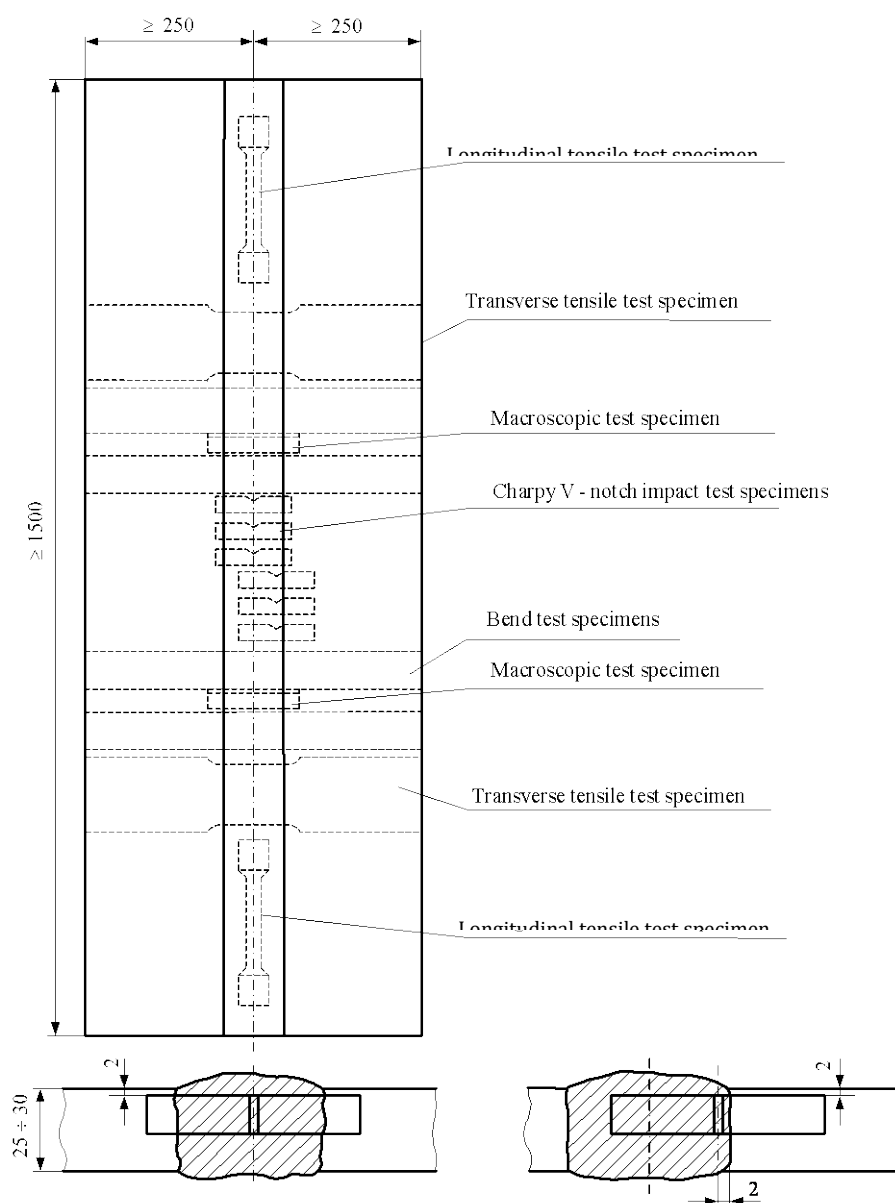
Electroslag and electrogas butt weld test assembly
